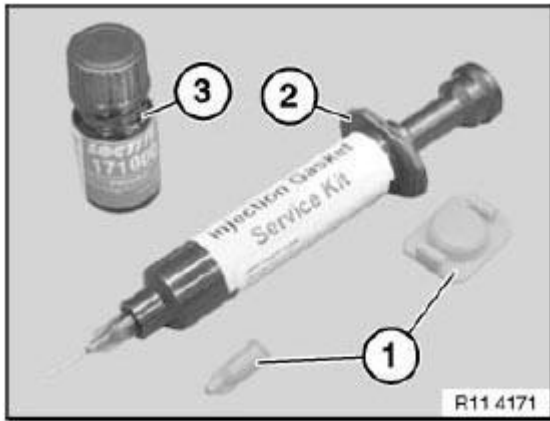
Identifying Liquid Gasket And Special Tool 11 4 370
